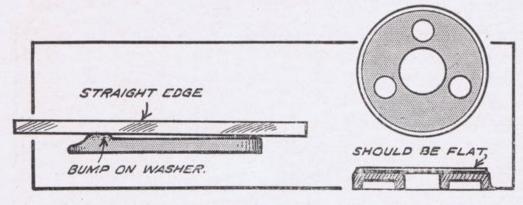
Testing for Flatness of Rubber Retaining Washer. Using a Straightedge.
